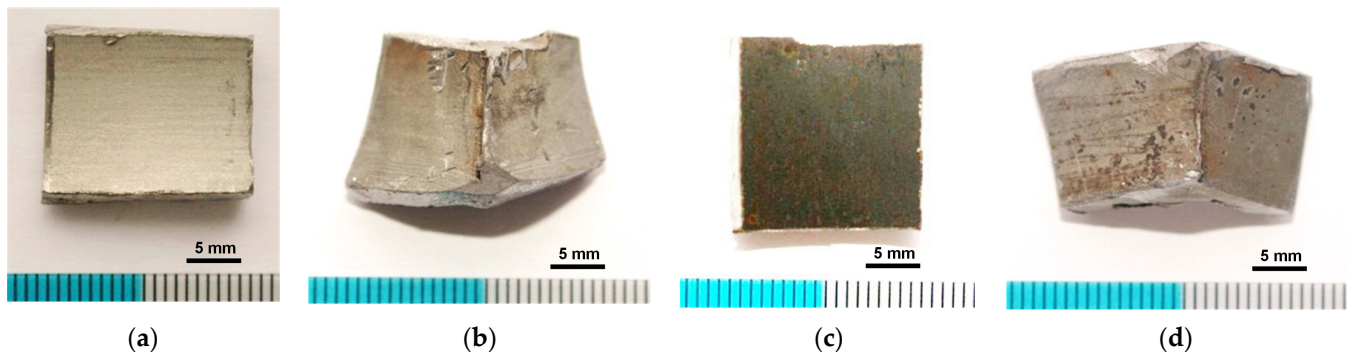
Macroscopic image of the internal surfaces of the tested specimens after chlorination: (a) Sample No. 1—cooler zone; (b) Sample No. 2—weld in cooler zone; (c) Sample No. 3—heater zone; (d) Sample No. 4—weld in heater zone.
